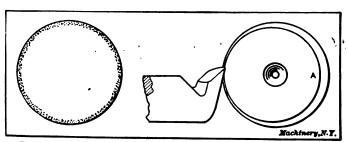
Tool Steel should be centered Concentric, in order to remove the Decarbonised Outer Surface
